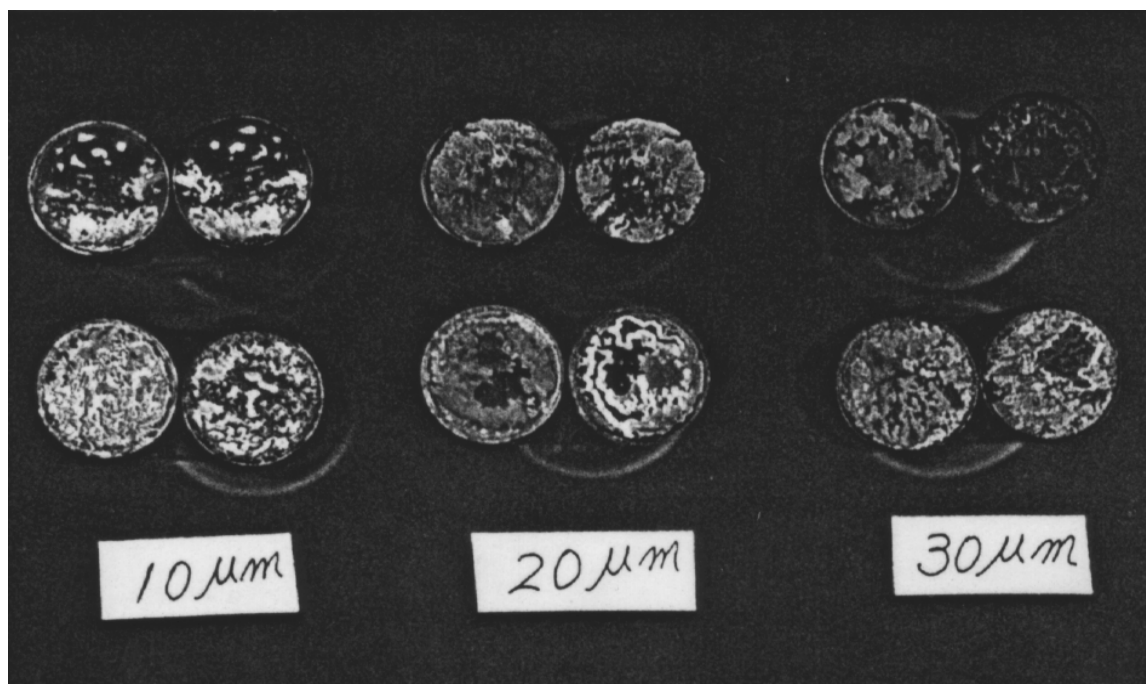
Fractured Cross Sectional View of the Cu-SiC-Cu Joint
